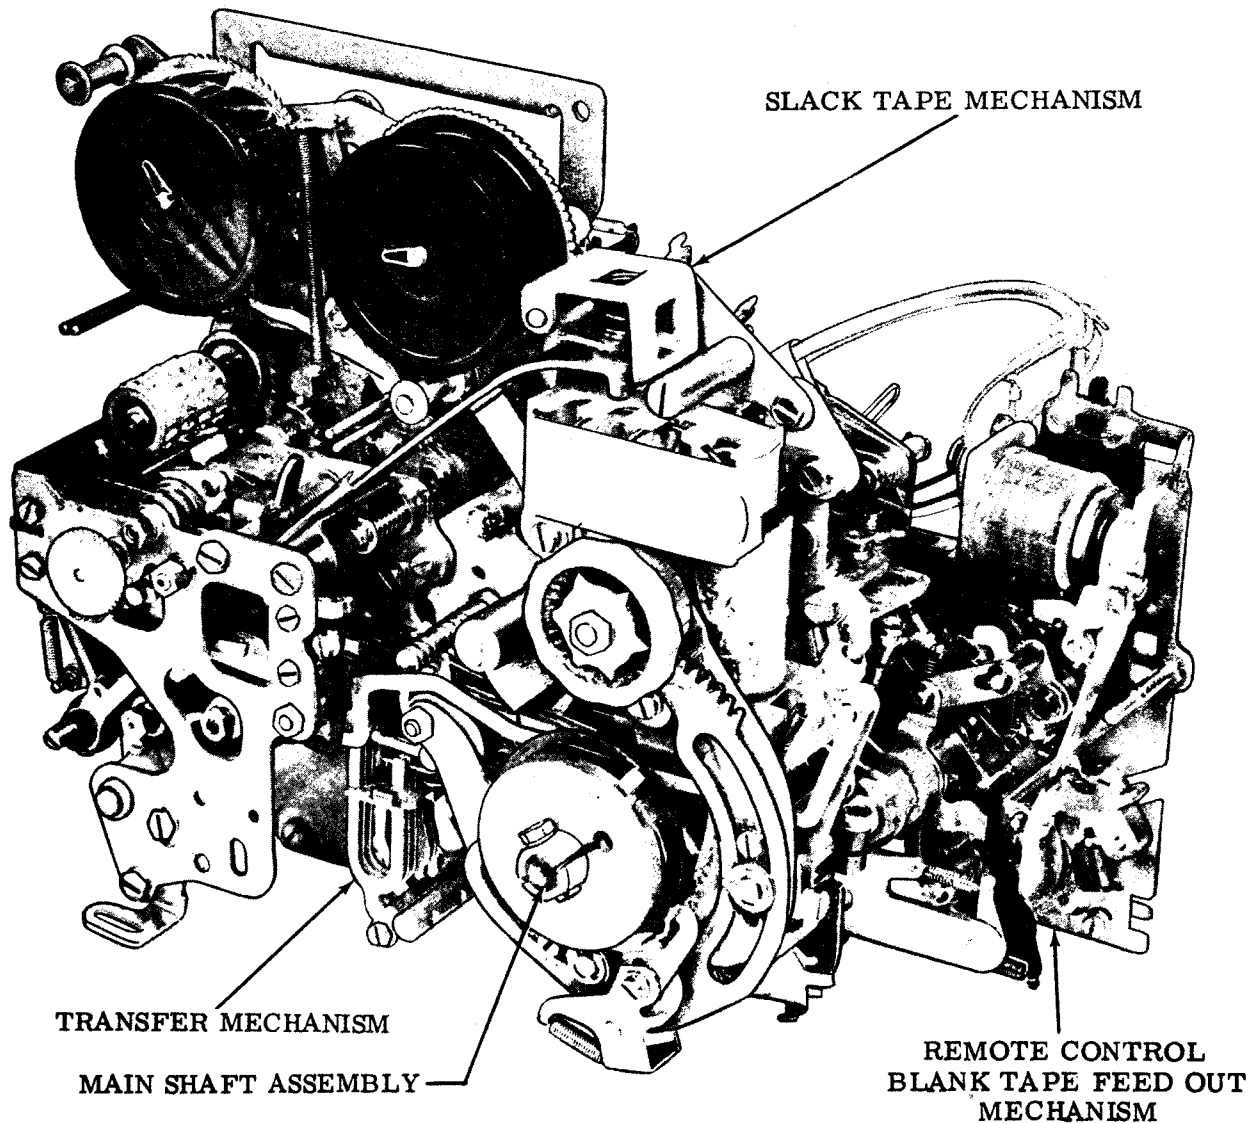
28 Typing Reperforator Unit With Remote Control BLANK Tape Feed Out Mechanism (Fully Perforated Tape)
